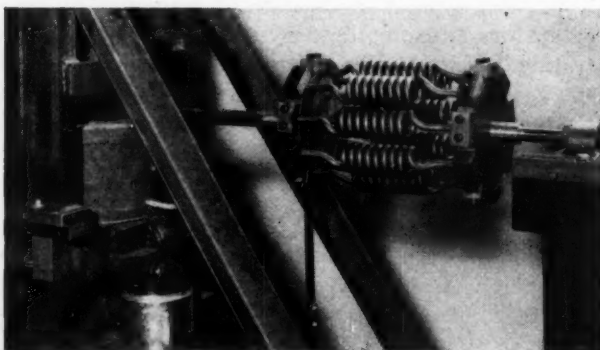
Helical springs apply accurate loading on alternating bending machine
